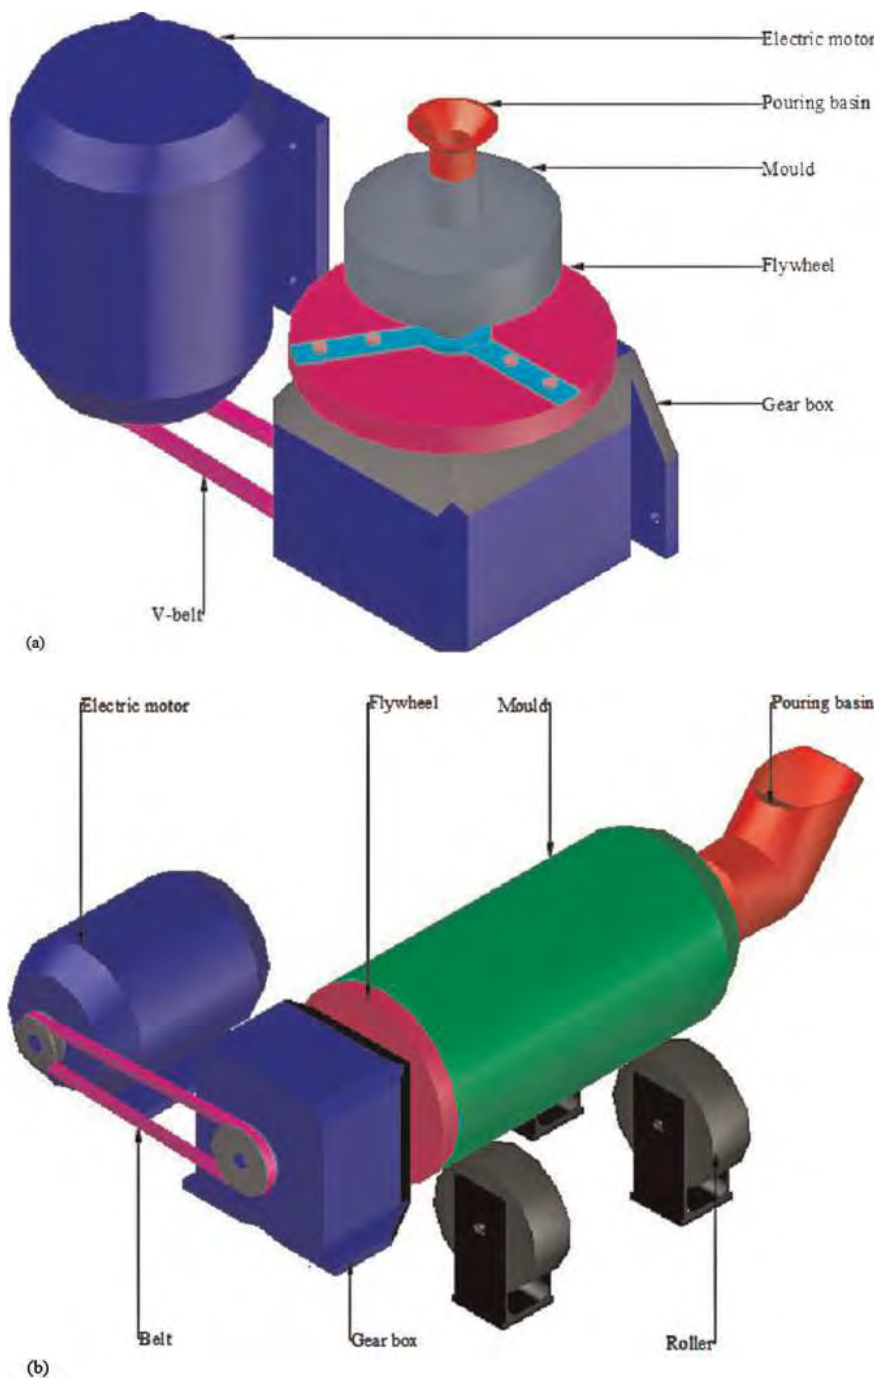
Schematic of (a) vertical centrifugal casting machine, and (b) horizontal centrifugal casting machine.
